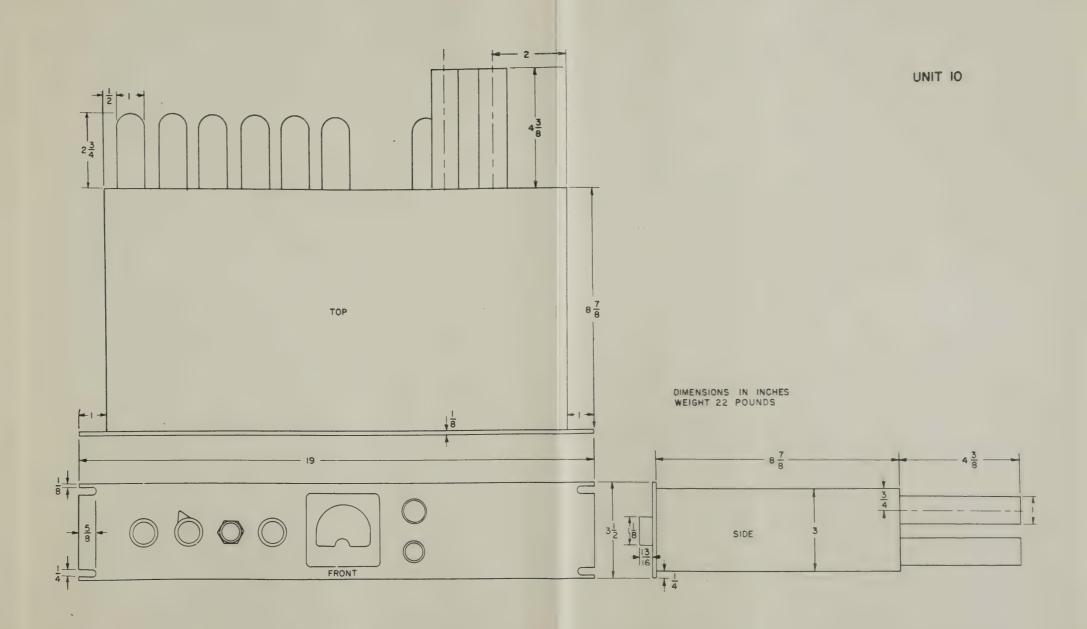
Keyer KY-79/UR, Outline Dimensions
